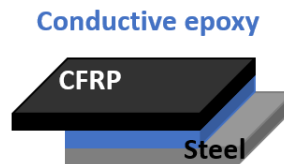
Schematic diagram of the CFRP-steel single-lap joints joined by conductive adhesive.
